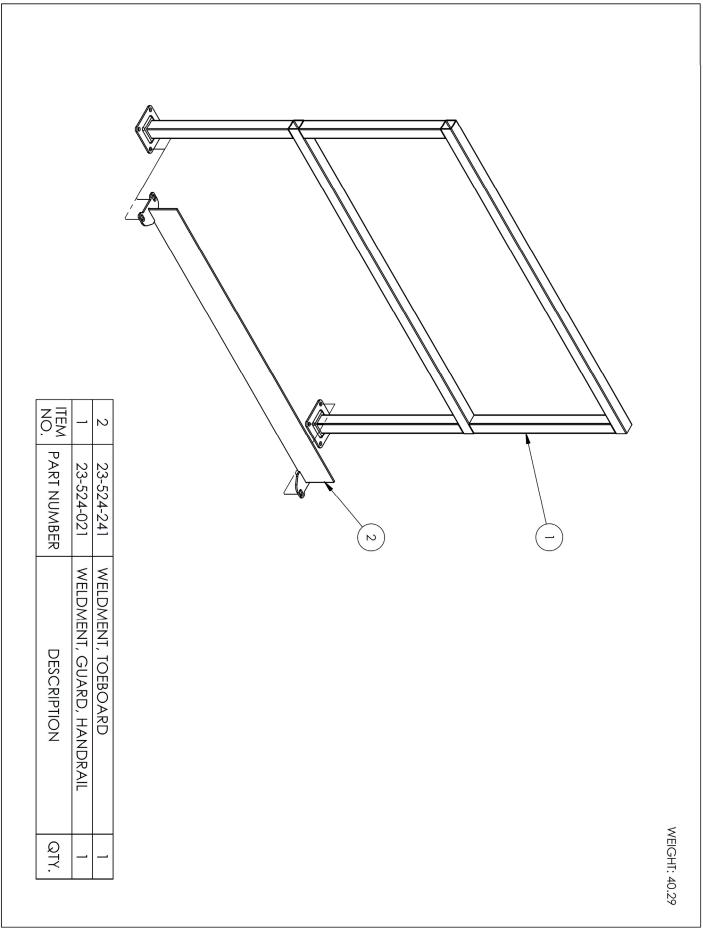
SQ-72-TB Exploded Parts Diagram and Bill of Materials
